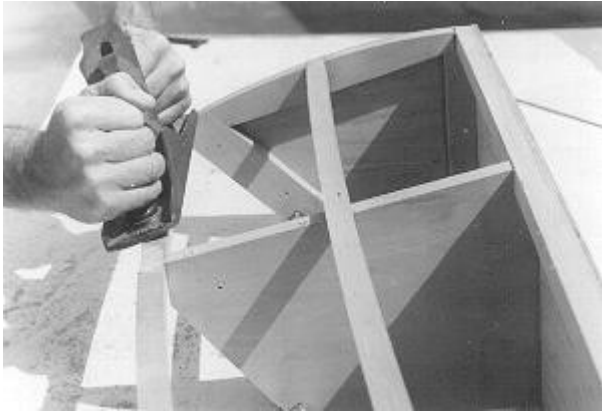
In the aft section, excess material is removed with a hand plane. All fairing should be done carefully to prevent humps or dips.
